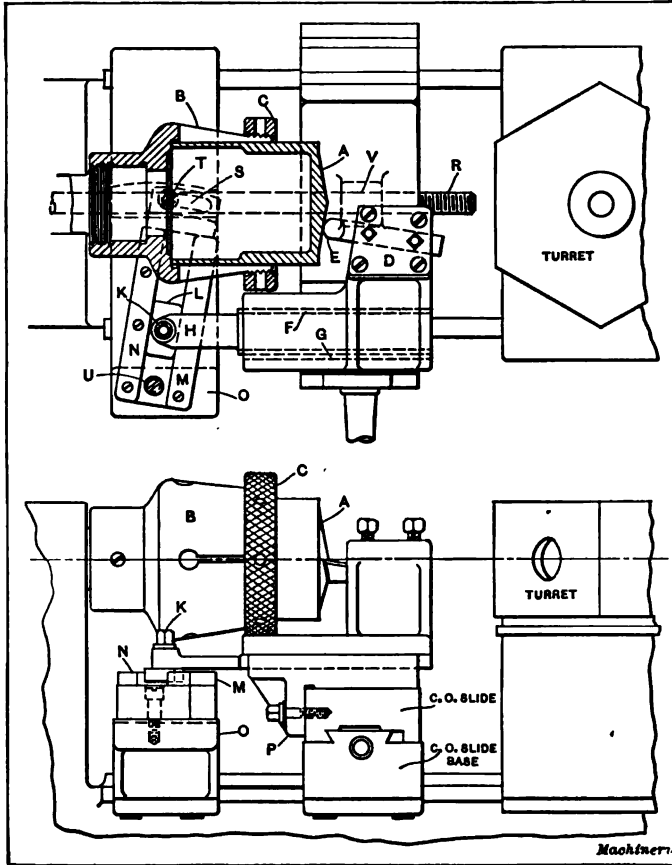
Turret Lathe Taper Attachment for Machining the End of an Automobile Engine Piston
